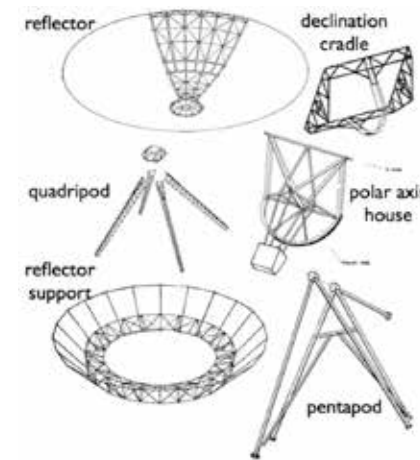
Exploded view of the major antenna sections. Polar axis house and declination cradle are welded in accurate templates.
